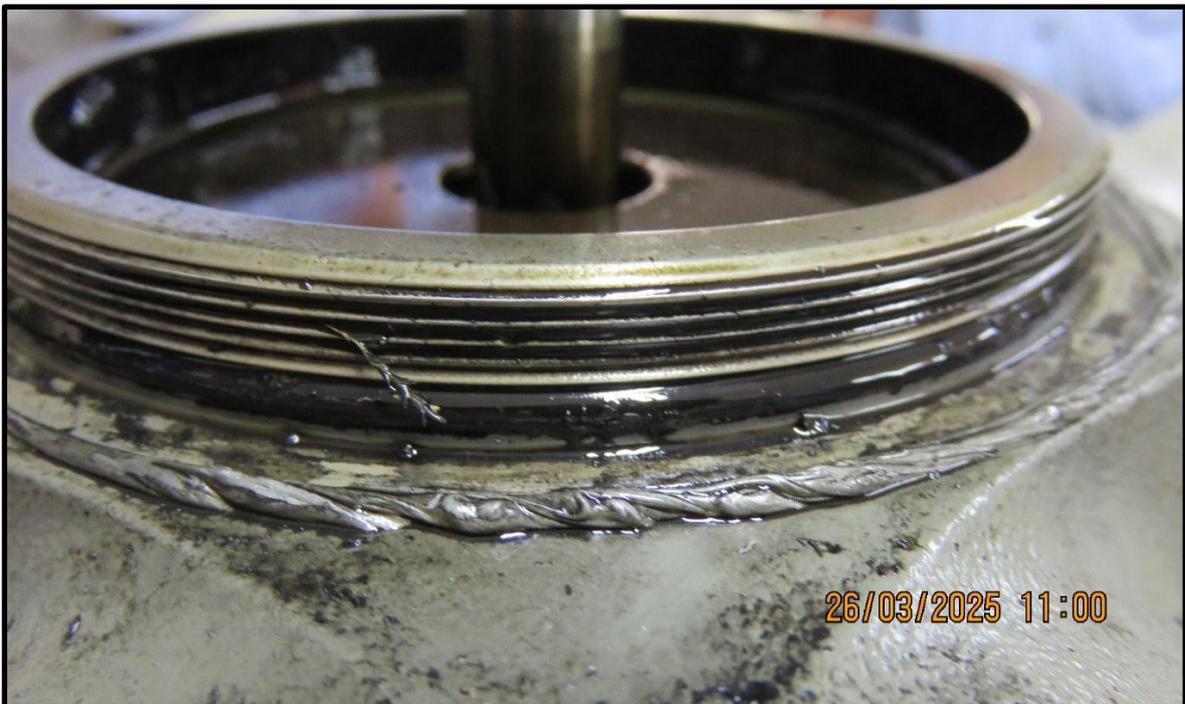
The threads of the intact propeller assembly with the rubber seal in place.
